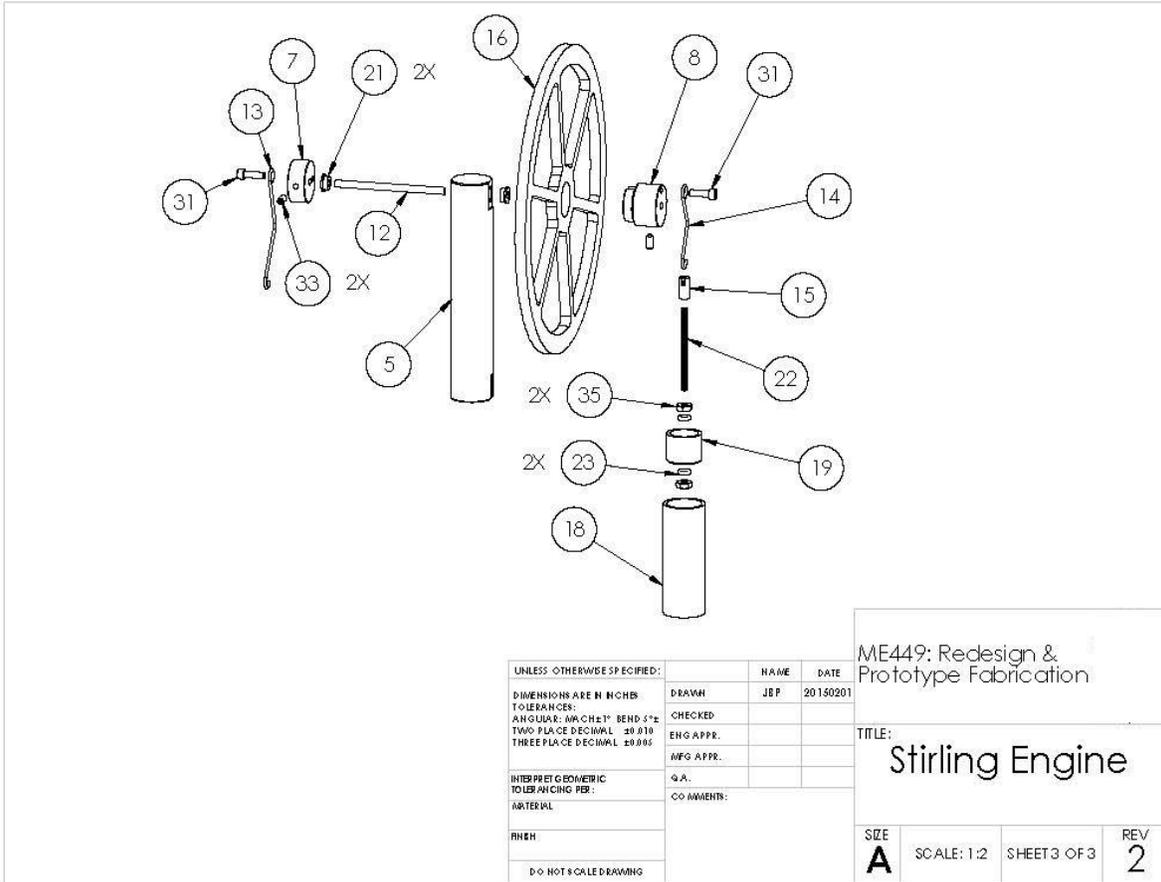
Stirling Engine Assembly and Bill of Materials - sheet 3
